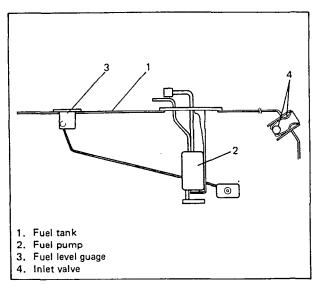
C-2 Fuel Pump, Level Gauge and Inlet Valve
